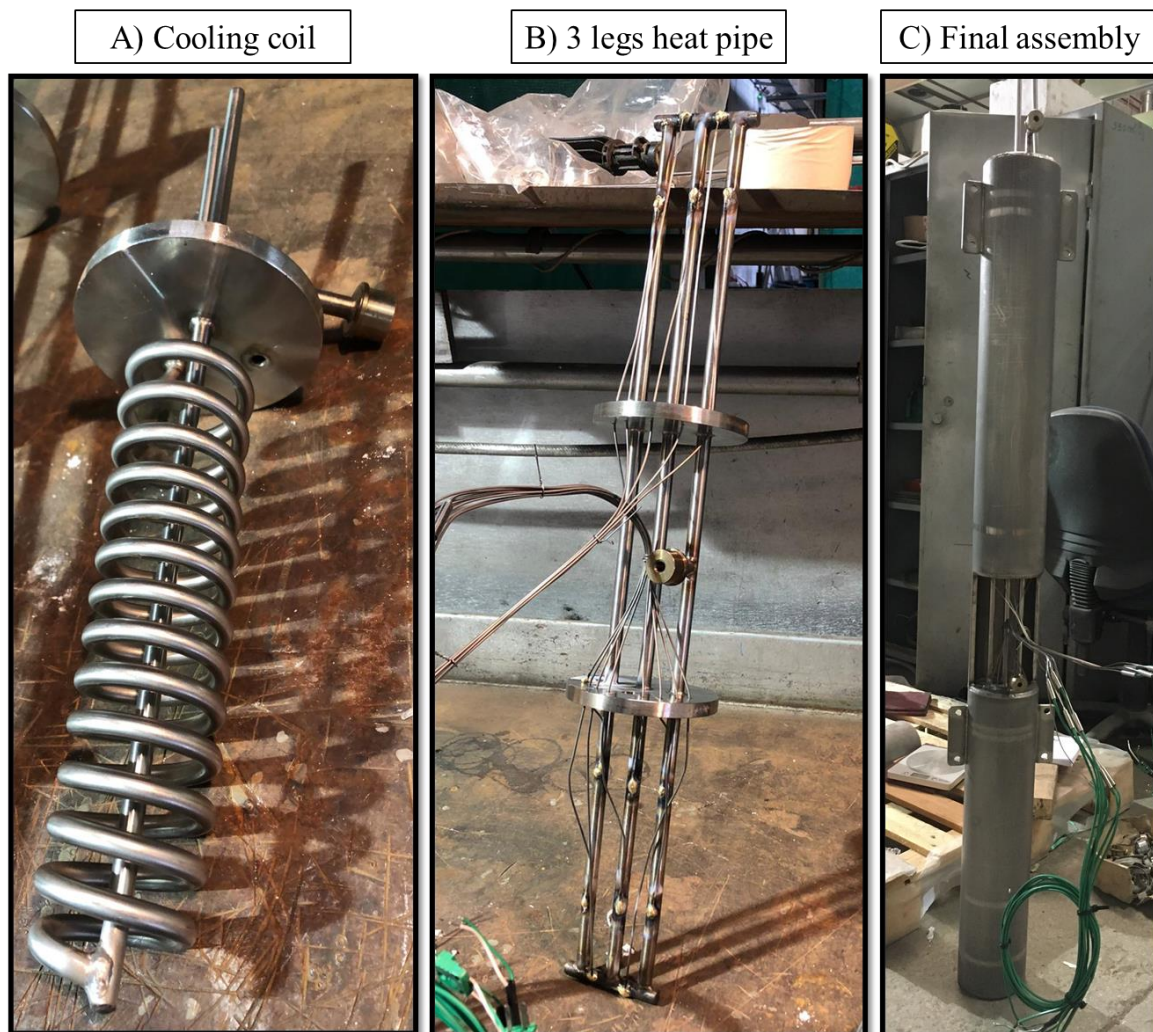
Manufacturing process of the three legs heat pipe prototype
